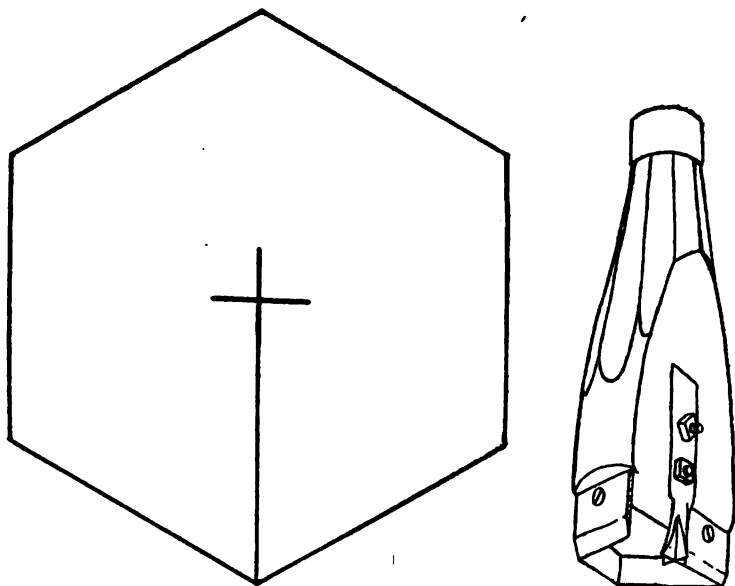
TAR-PAPER PAD AND TOOL FOR CUTTING.
